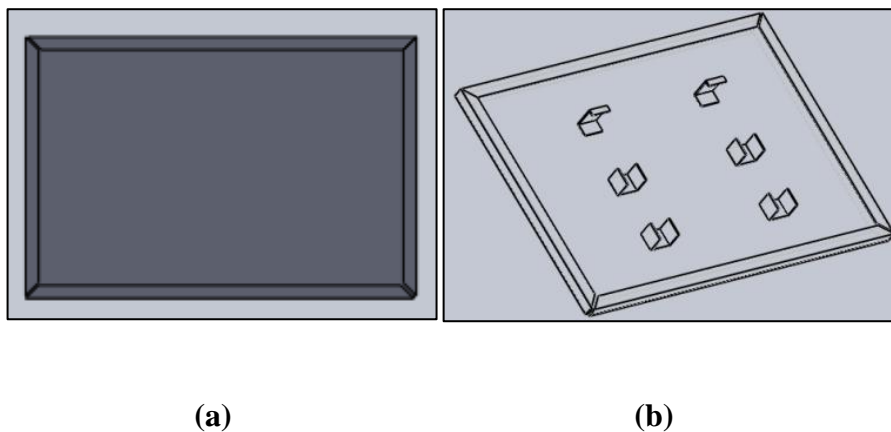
(a): Front View of White Board (b): Back View of White Board
